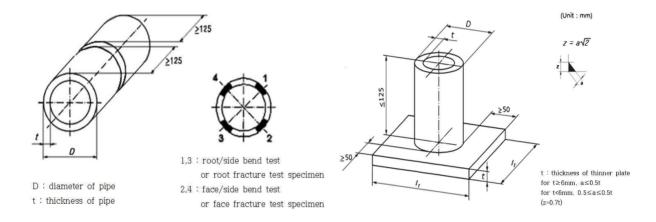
Dimensions and types of test assembly for pipe butt welds
